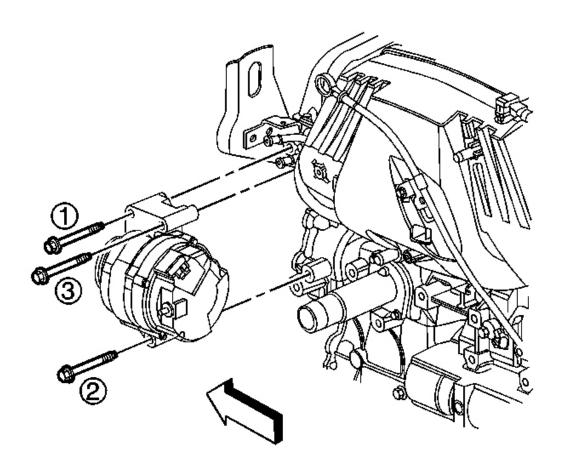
View Of Generator Mounting Bolts Courtesy of GENERAL MOTORS CORP.
